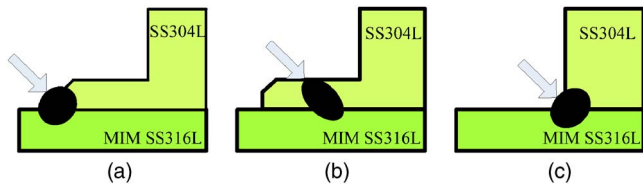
Illustration of different welding geometries: (a) lap-fillet, (b) lap, and (c) fillet joints.
